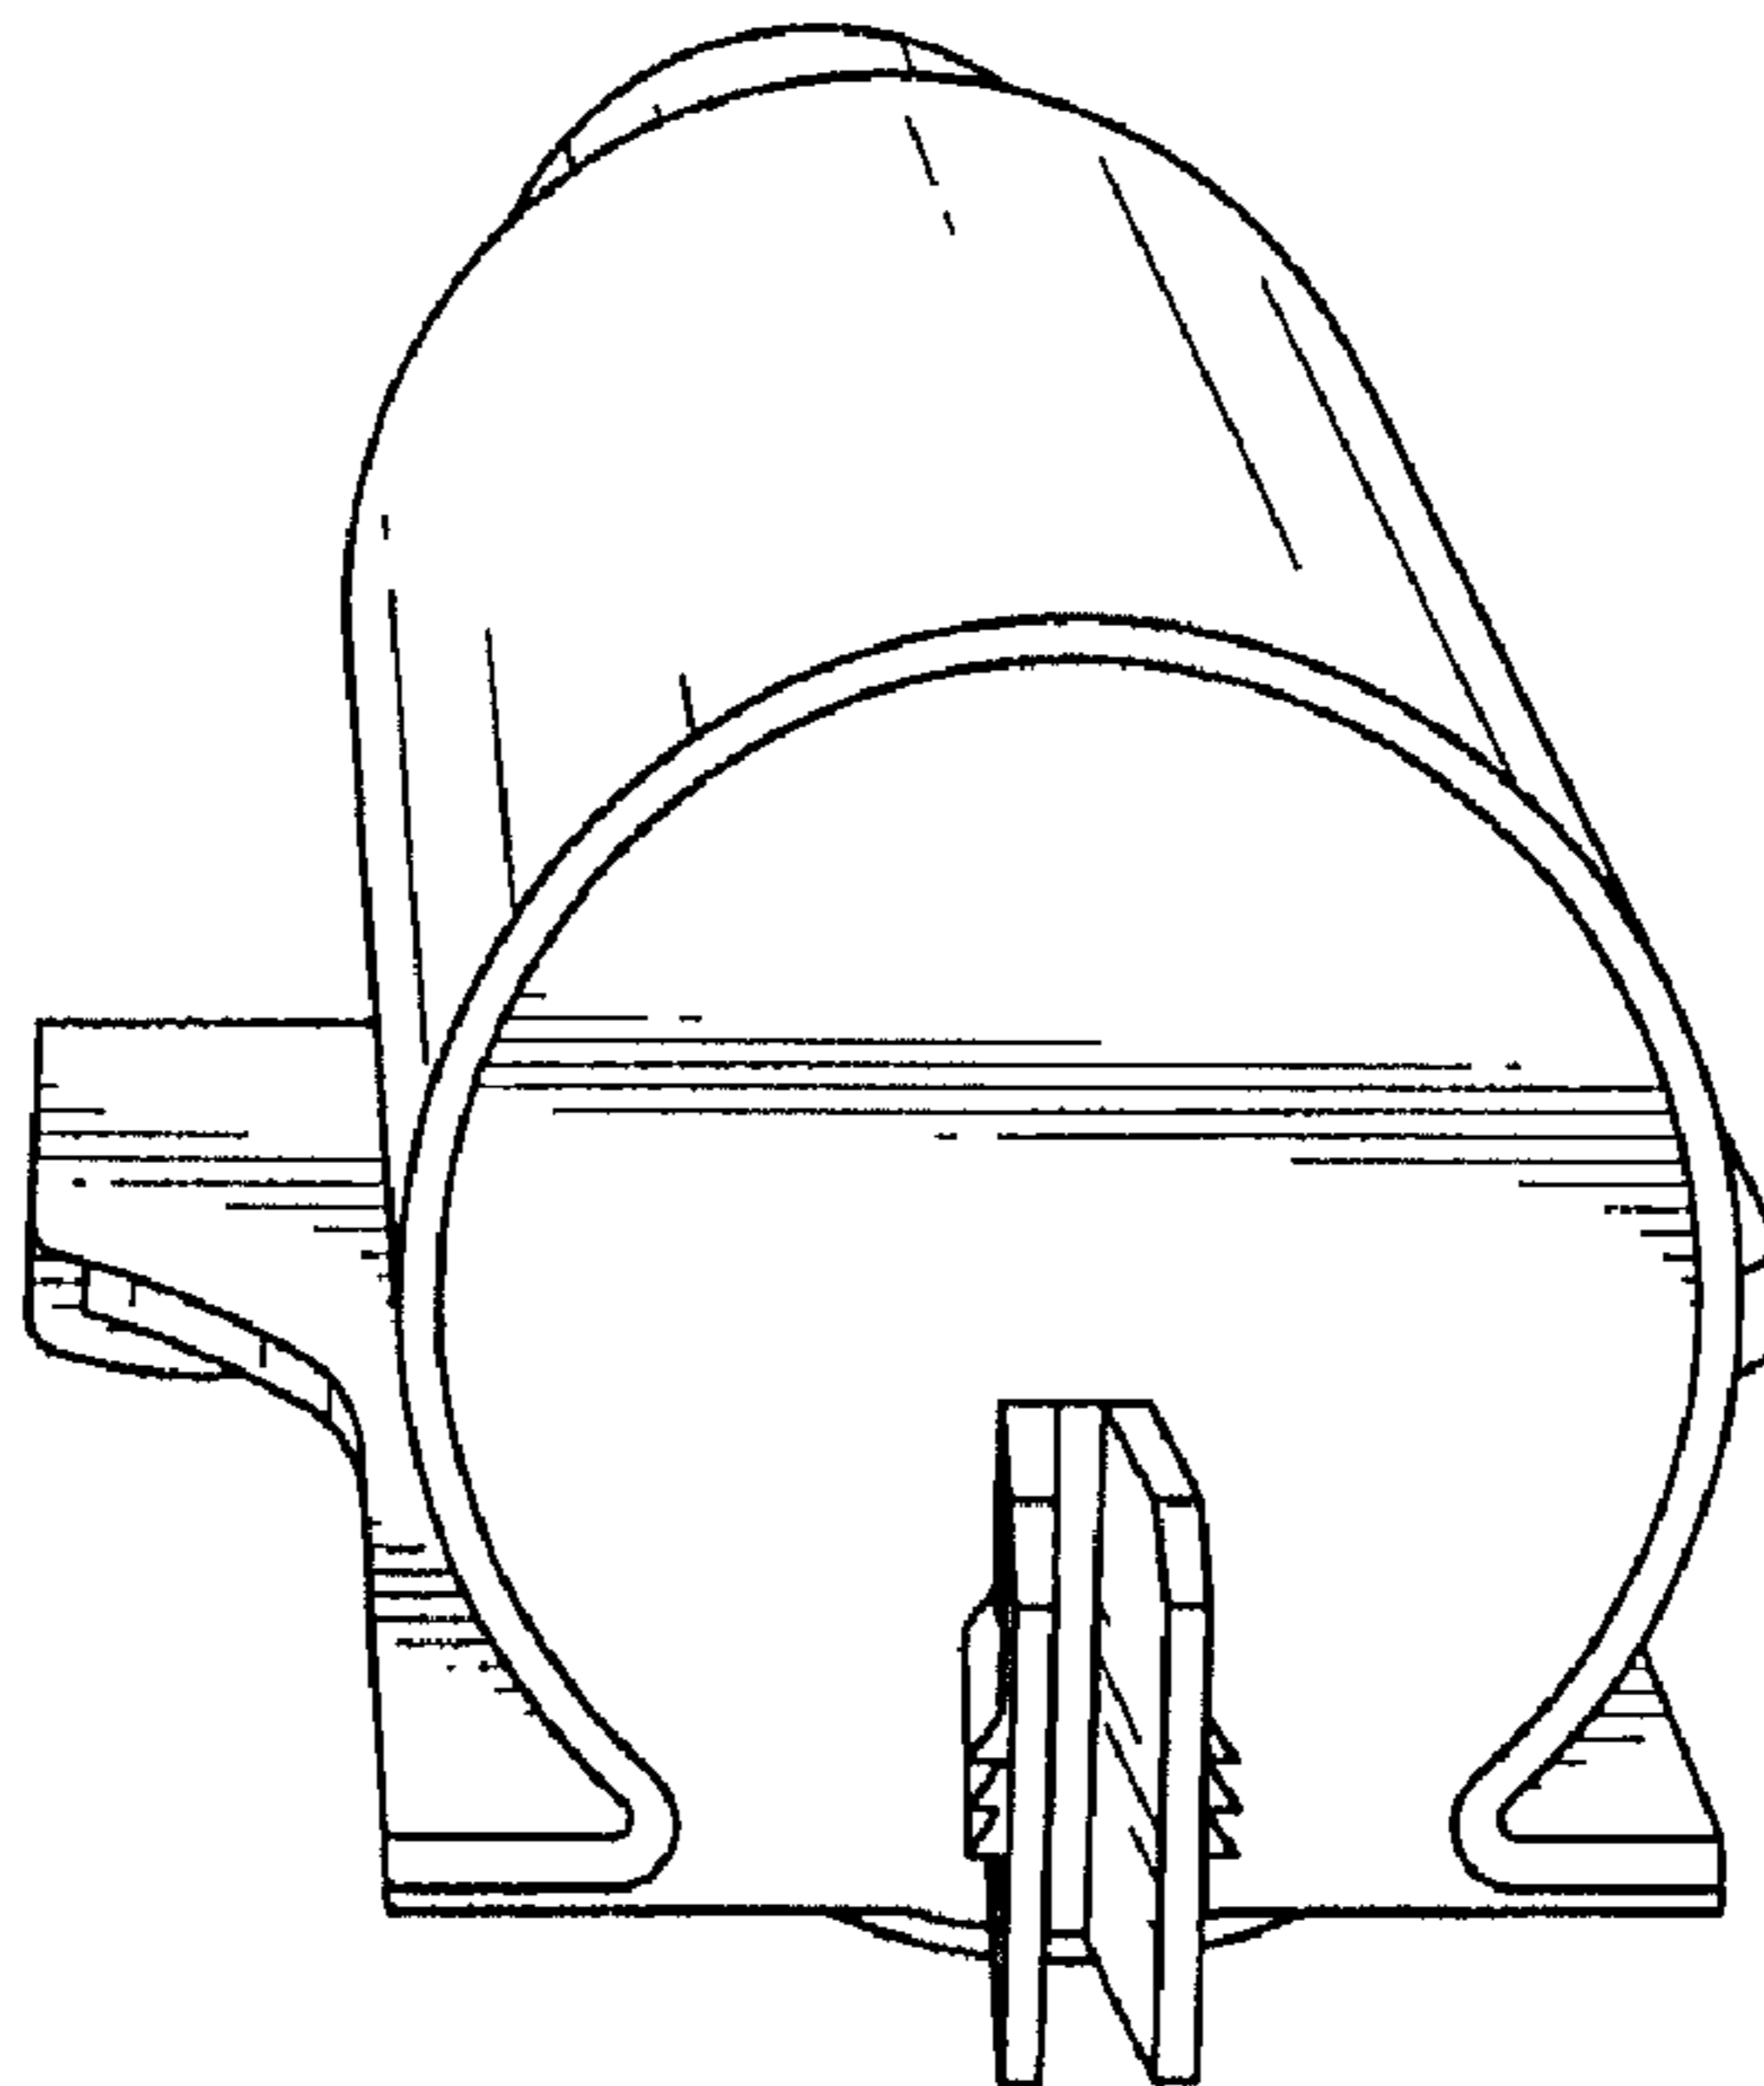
is a perspective view of the adjustable rear support of FIG. 2 and the piston of FIG. 1, the arrow indicating that the adjustable rear support is attached in an upward position;
